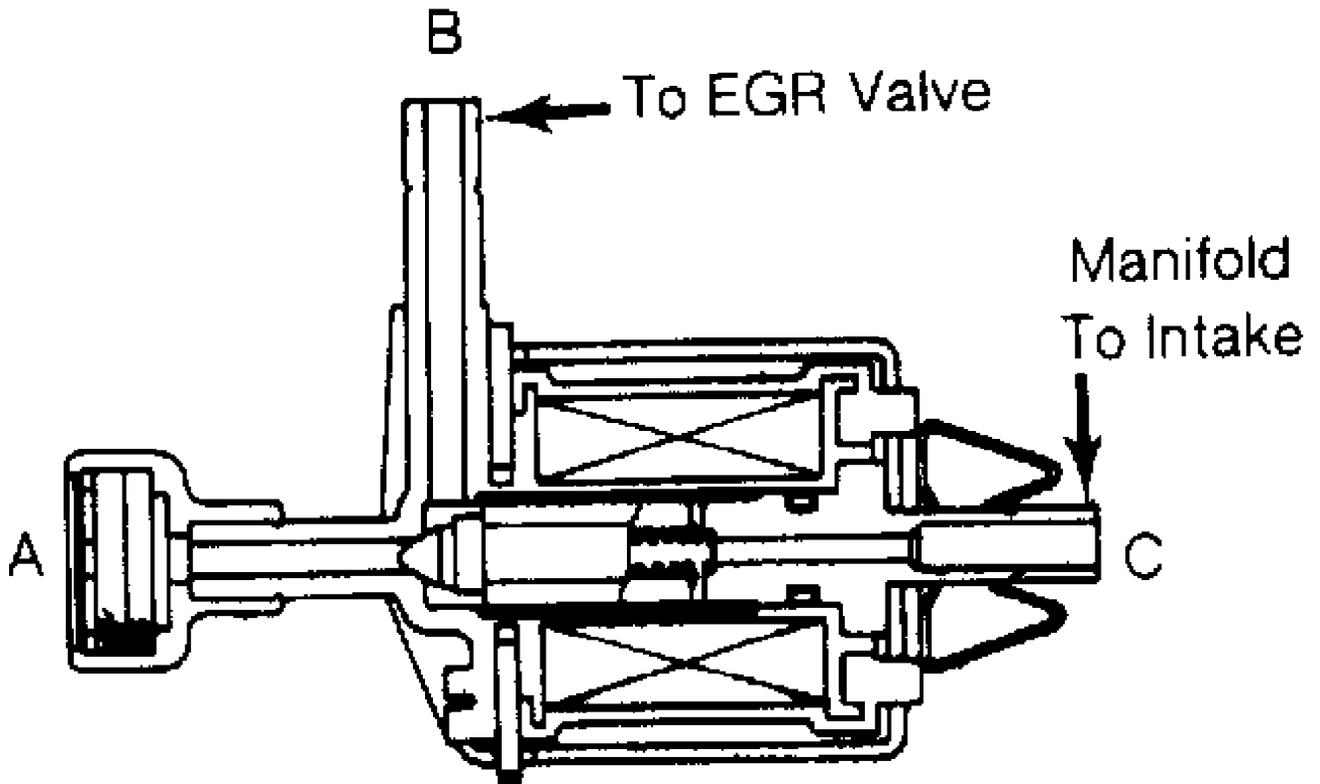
Cross-Sectional View Of EGR Solenoid Valve
